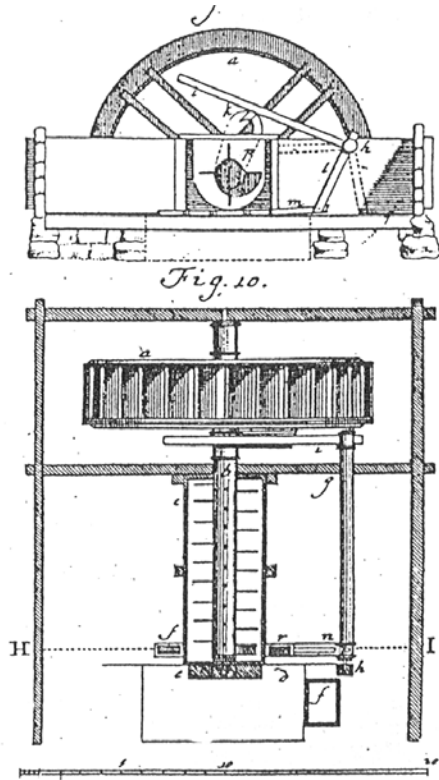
Soft-mud moulding machine with horizontal pug mill by C. Wijnblad, 1767
